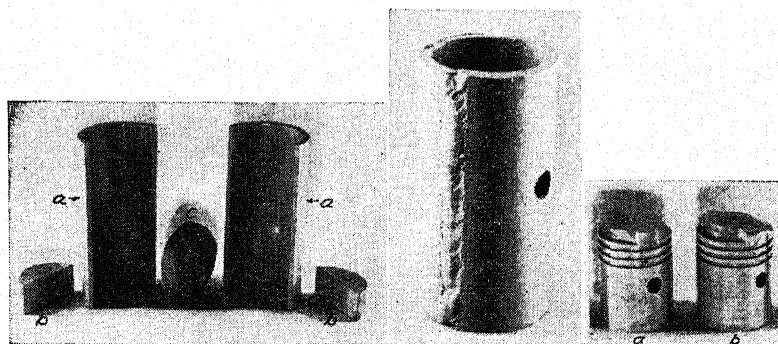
, left, parts of engine piston; center, two cylinder halves welded together; right, completed piston (a), cast iron piston (b).
